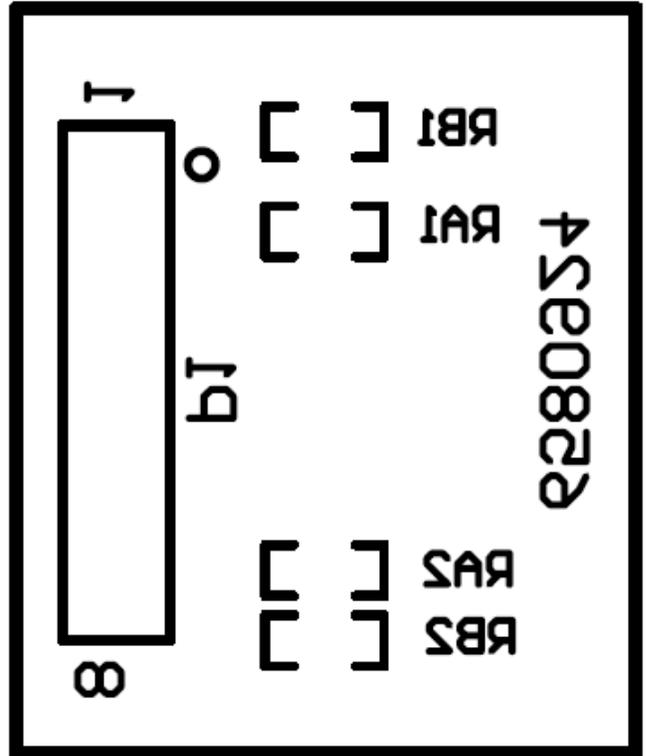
NJL5310R Sensor Board Bottom Silk Screen
